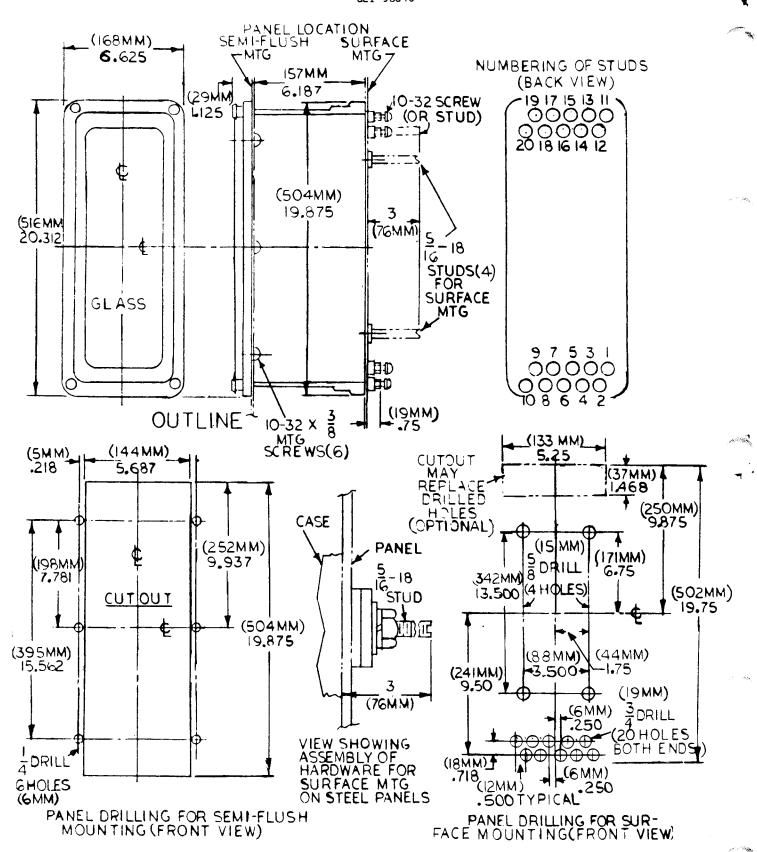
(6209276-3) Outline and Panel Drilling Dimensions for Type JBCG Relays
